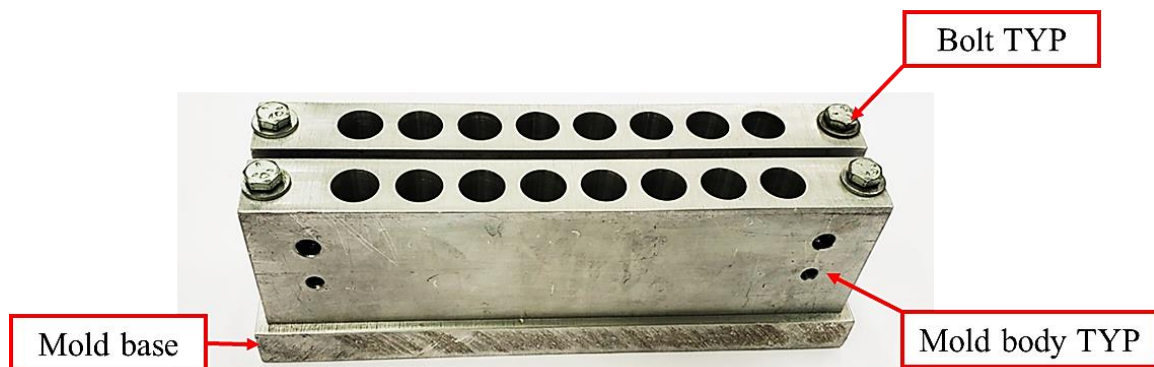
Custom-designed mold to manufacture the hand-cast samples.
